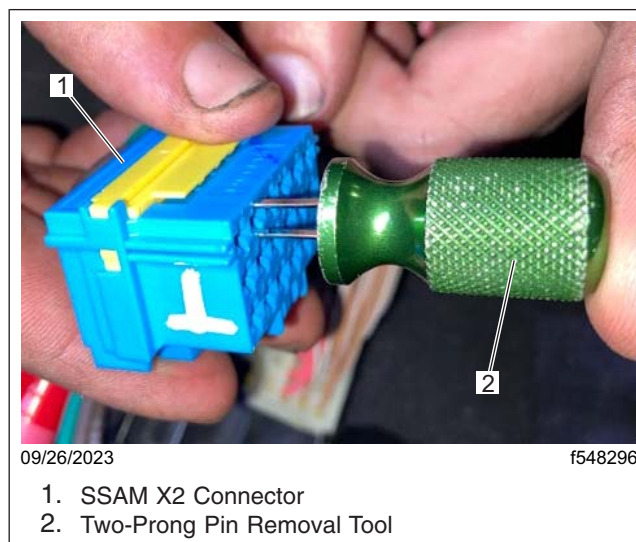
, Removing the Wire Using Two-Prong Pin Removal Tool
